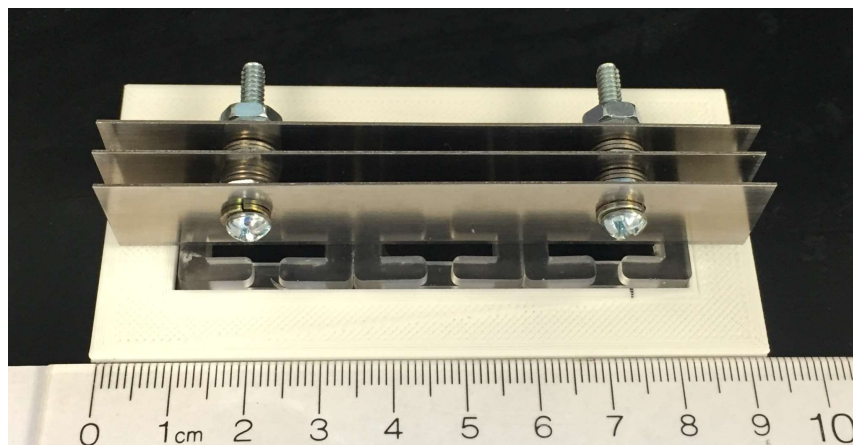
Cutting tool and PLA cutting guard with PDMS frames.
